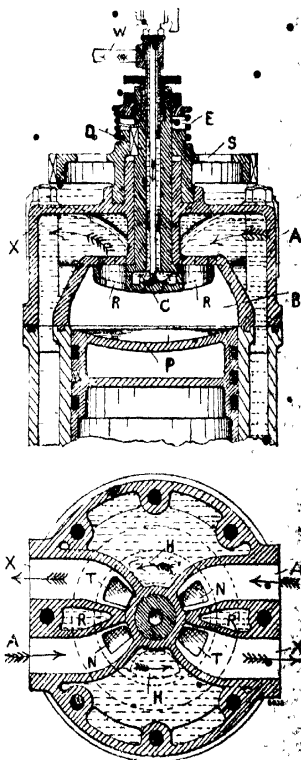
Combined admission and exhaust rotary disc valve for vertical four-stroke engine—Raymond
